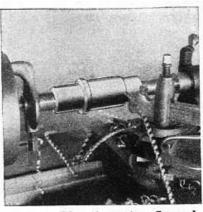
Manufacturing Steel Sleeves on a 16-inch Lathe
